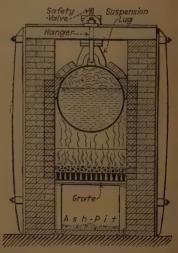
Cross-sectional elevation of plain-cylindrical boilers.
